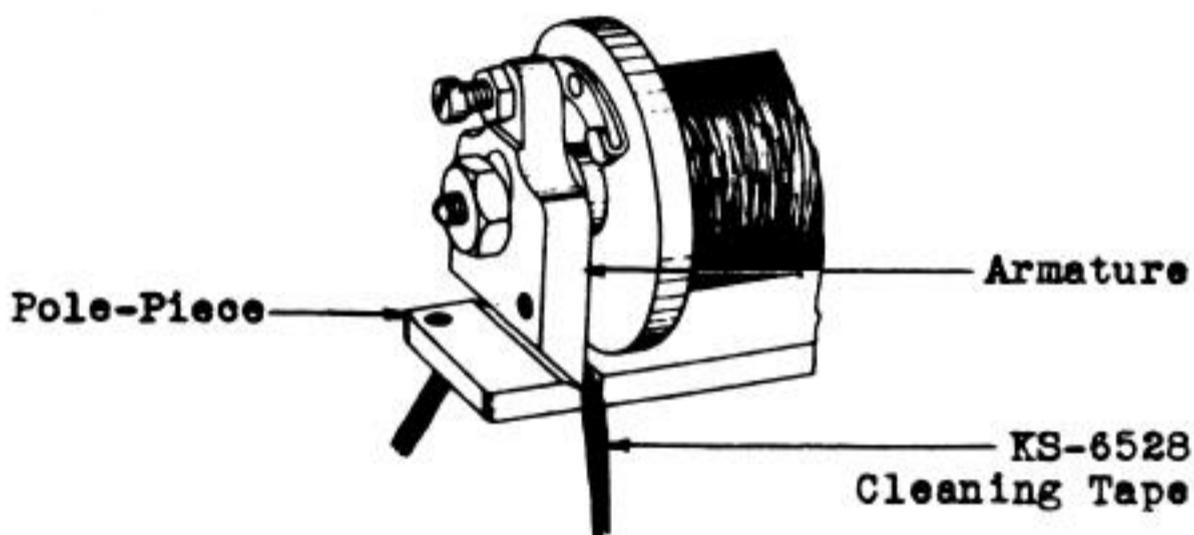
Method of Cleaning Armature Slot and Armature Knife Edge on 89, 101, 105, 108, 118 and 172 Type Relays
